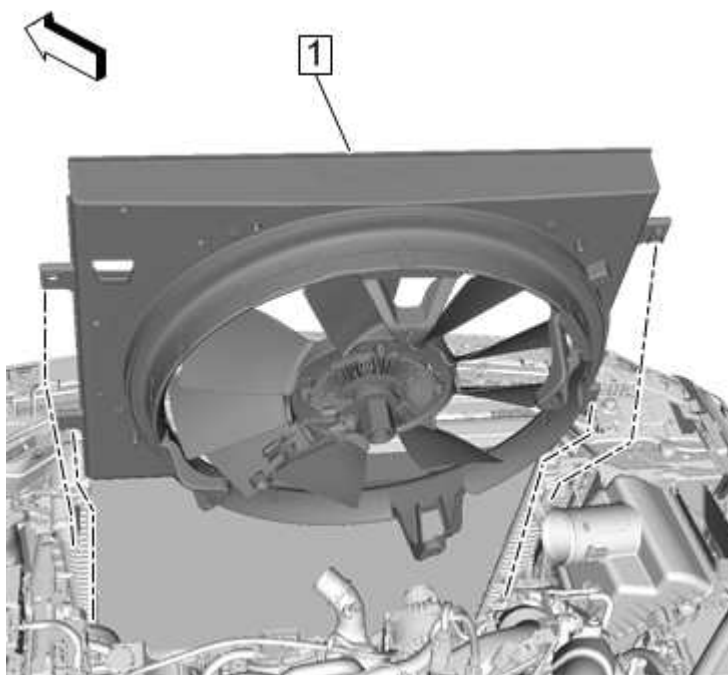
Fan Blade, Fan Blade Clutch And Engine Coolant Fan Shrouds Assembly
